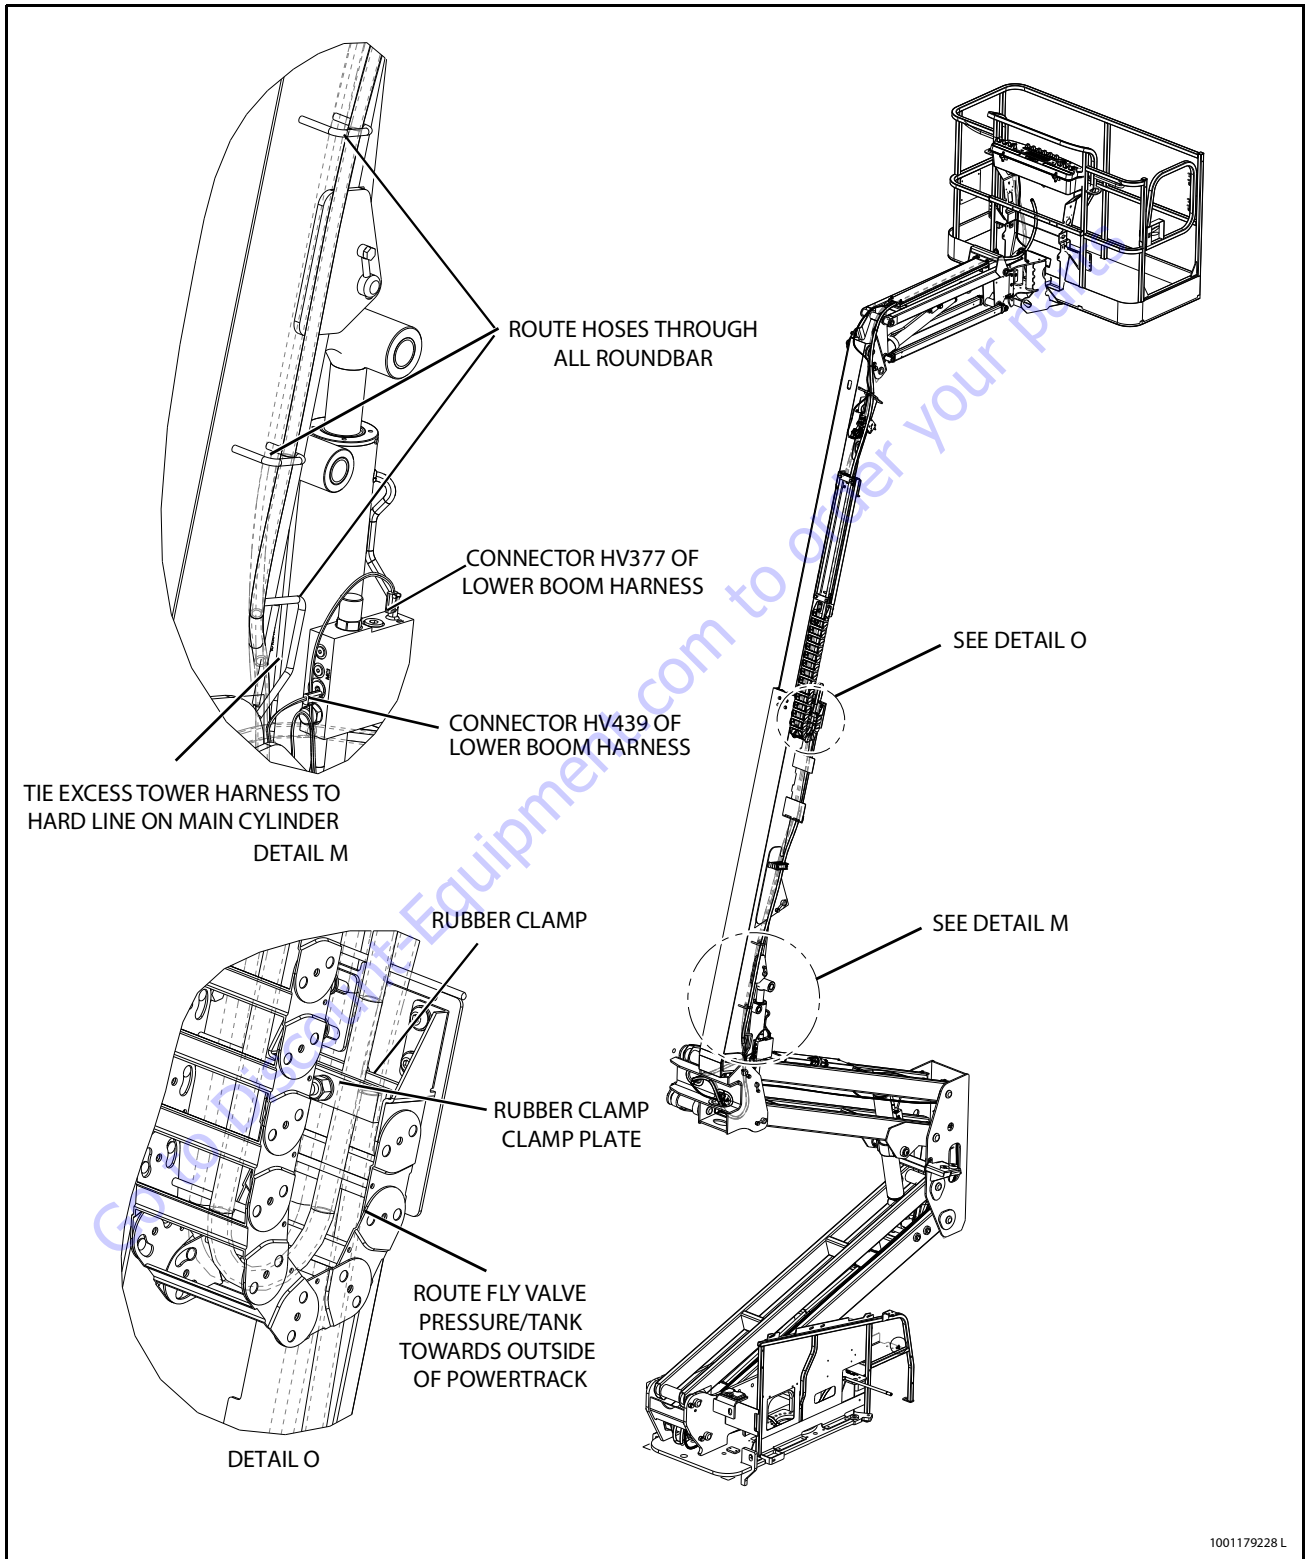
Cables and Clamps Installation - Sheet 5 of 8
